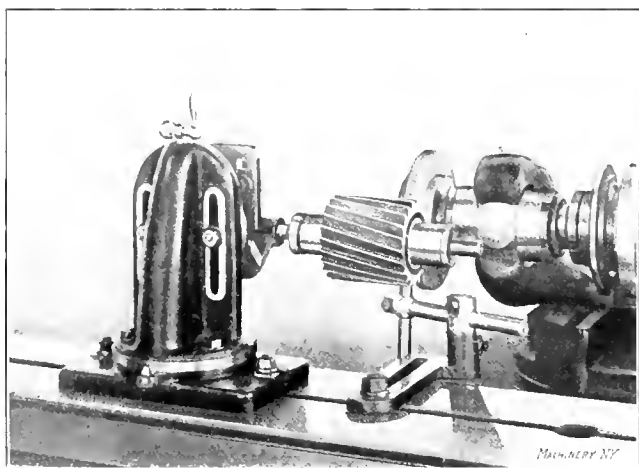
Spiral Milling Cutter being sharpened on Cutter Bar
